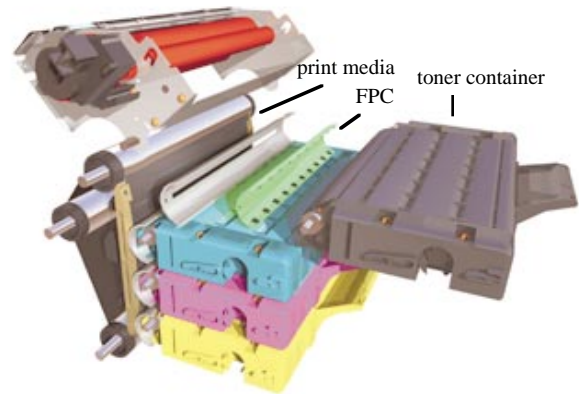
TonerJet[®] printer with four printheads, CMYK, using a transfer belt as print media.
